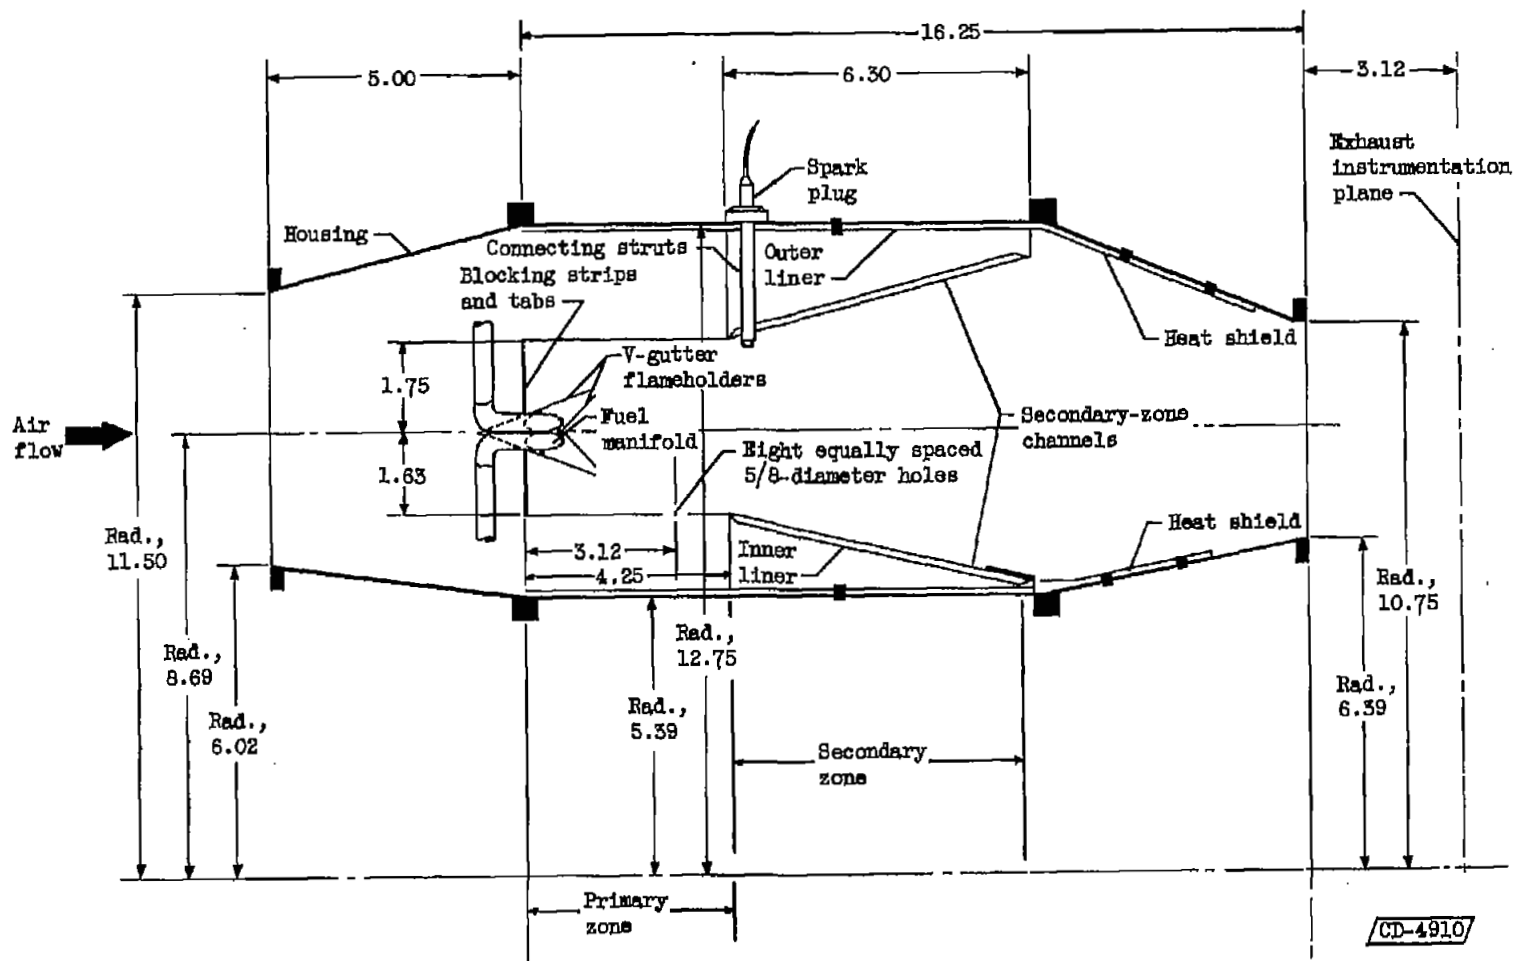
Cross-sectional view of final combustor configuration, model 8, assembled in quarter-annulus test ducting. (All dimensions in inches.)
